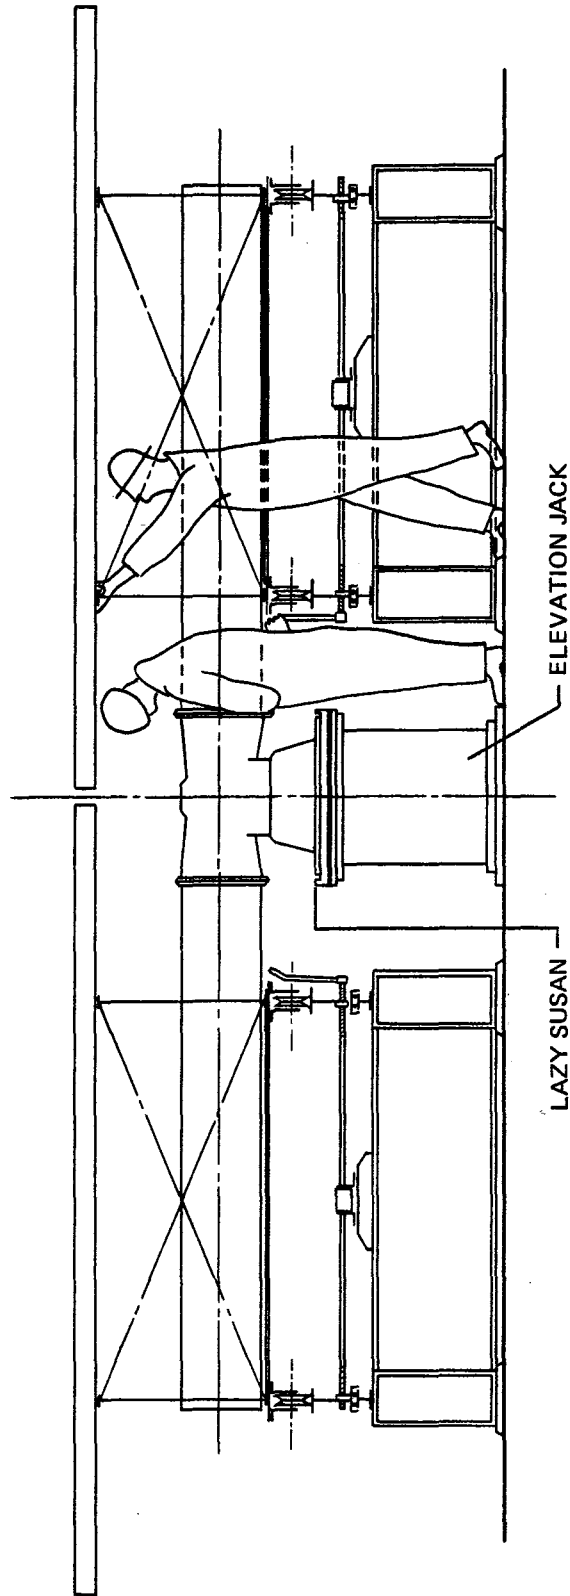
STATION NO. 2 -- JOINING OF HALF - FRAME AND DRIVE ASSEMBLIES
